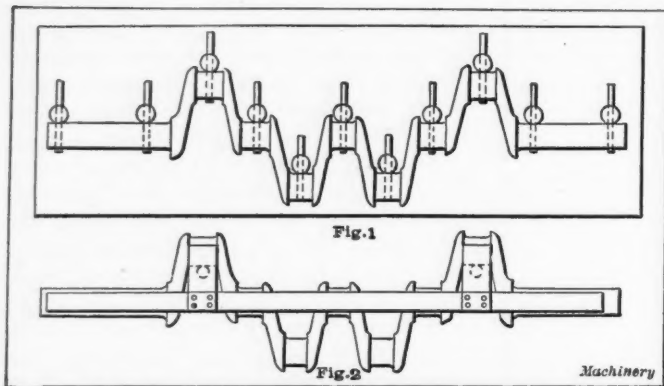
Plate used for Correcting Warped Crankshafts. Fig. 2. Gage for Cutting off Crankshaft to Right Length
